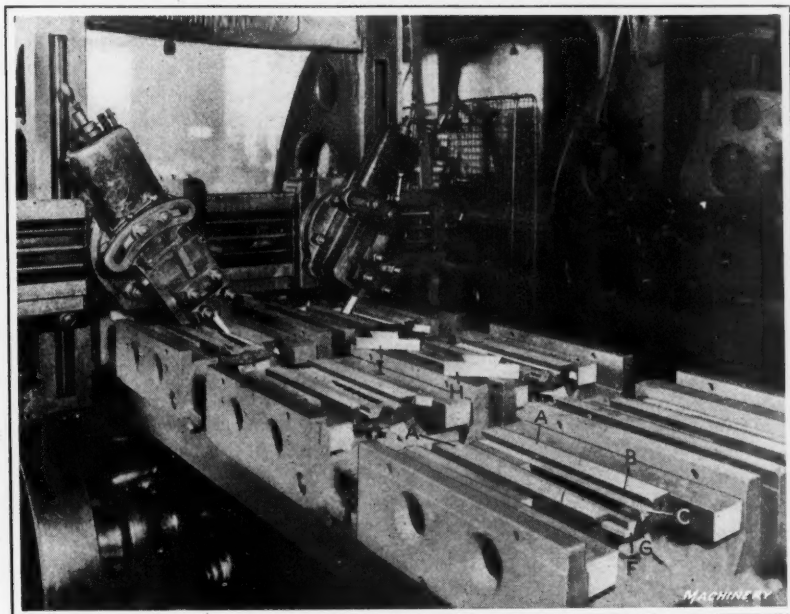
Close-up View of Two-position Fixture used for holding Lathe Top Slides for planing the Dovetailed Bearing and the Under-cut Fit for the Tapered Gib
